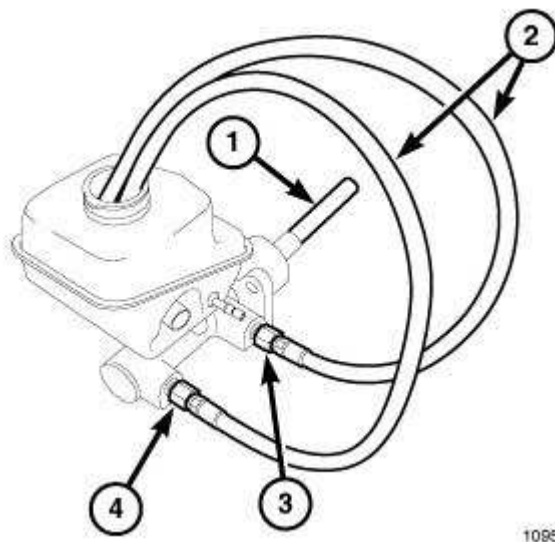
BLEEDING TOOLS ON MASTER CYLINDER
